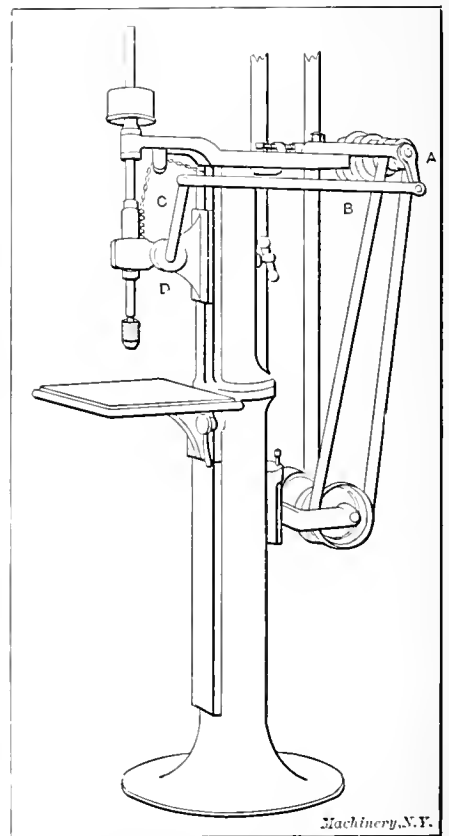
Drill Press arranged to give Reciprocating Movement to Spindle for Lapping
